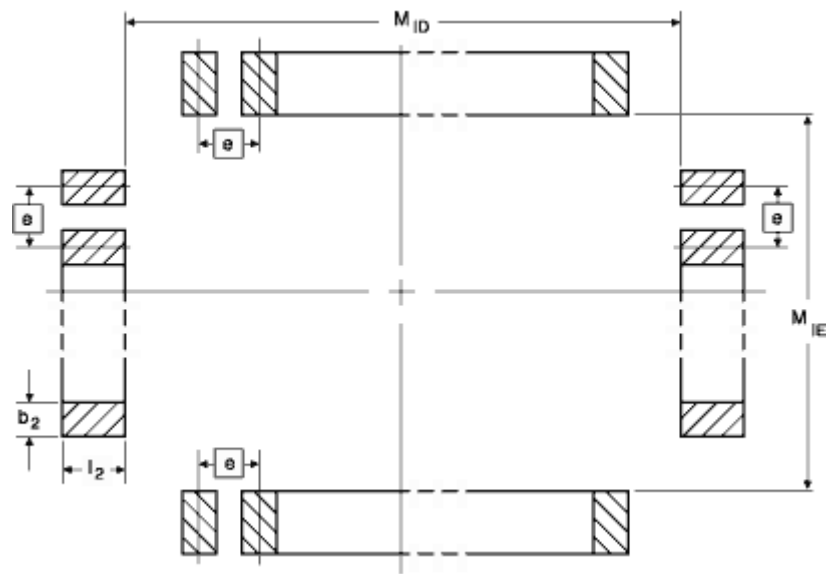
EIA Standard Board Layout of Soldered Pads for QFP Packages
